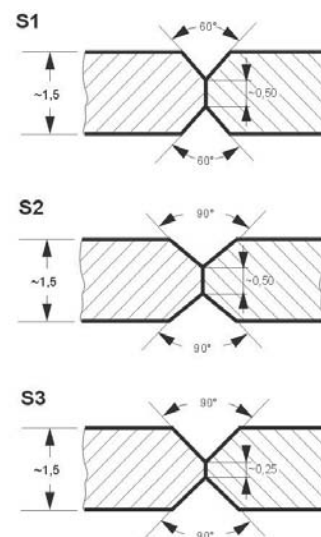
Methods for preparation of model of welds inner flap of the nickel superalloy ZS-3DK (ЖС-3ДК), the HPDL laser welding process
